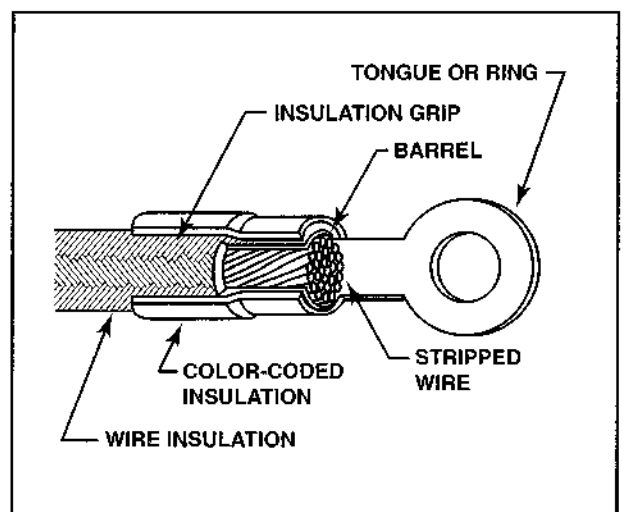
Wire gauge sizes 10 through 22 are typically terminated with preinsulated, solderless terminals that are color-coded to identify size.
